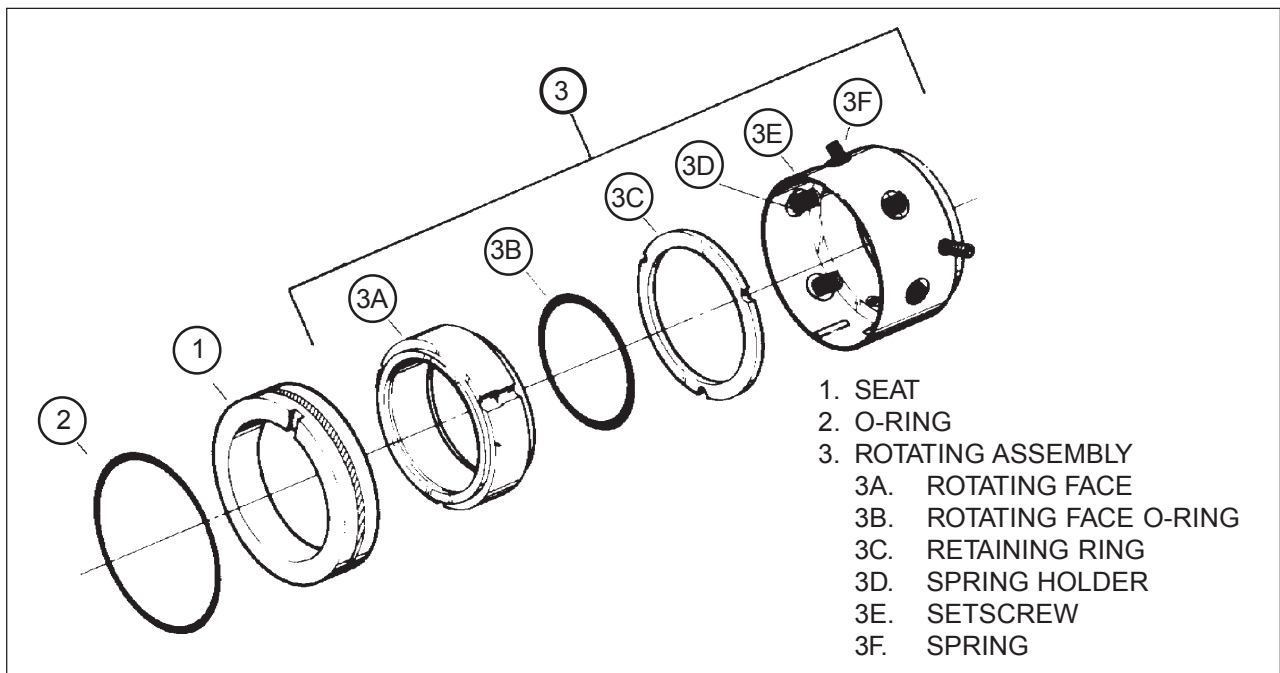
Borg Warner Type Q Mechanical Seal or Crane Type 8-1 Mechanical Seal
